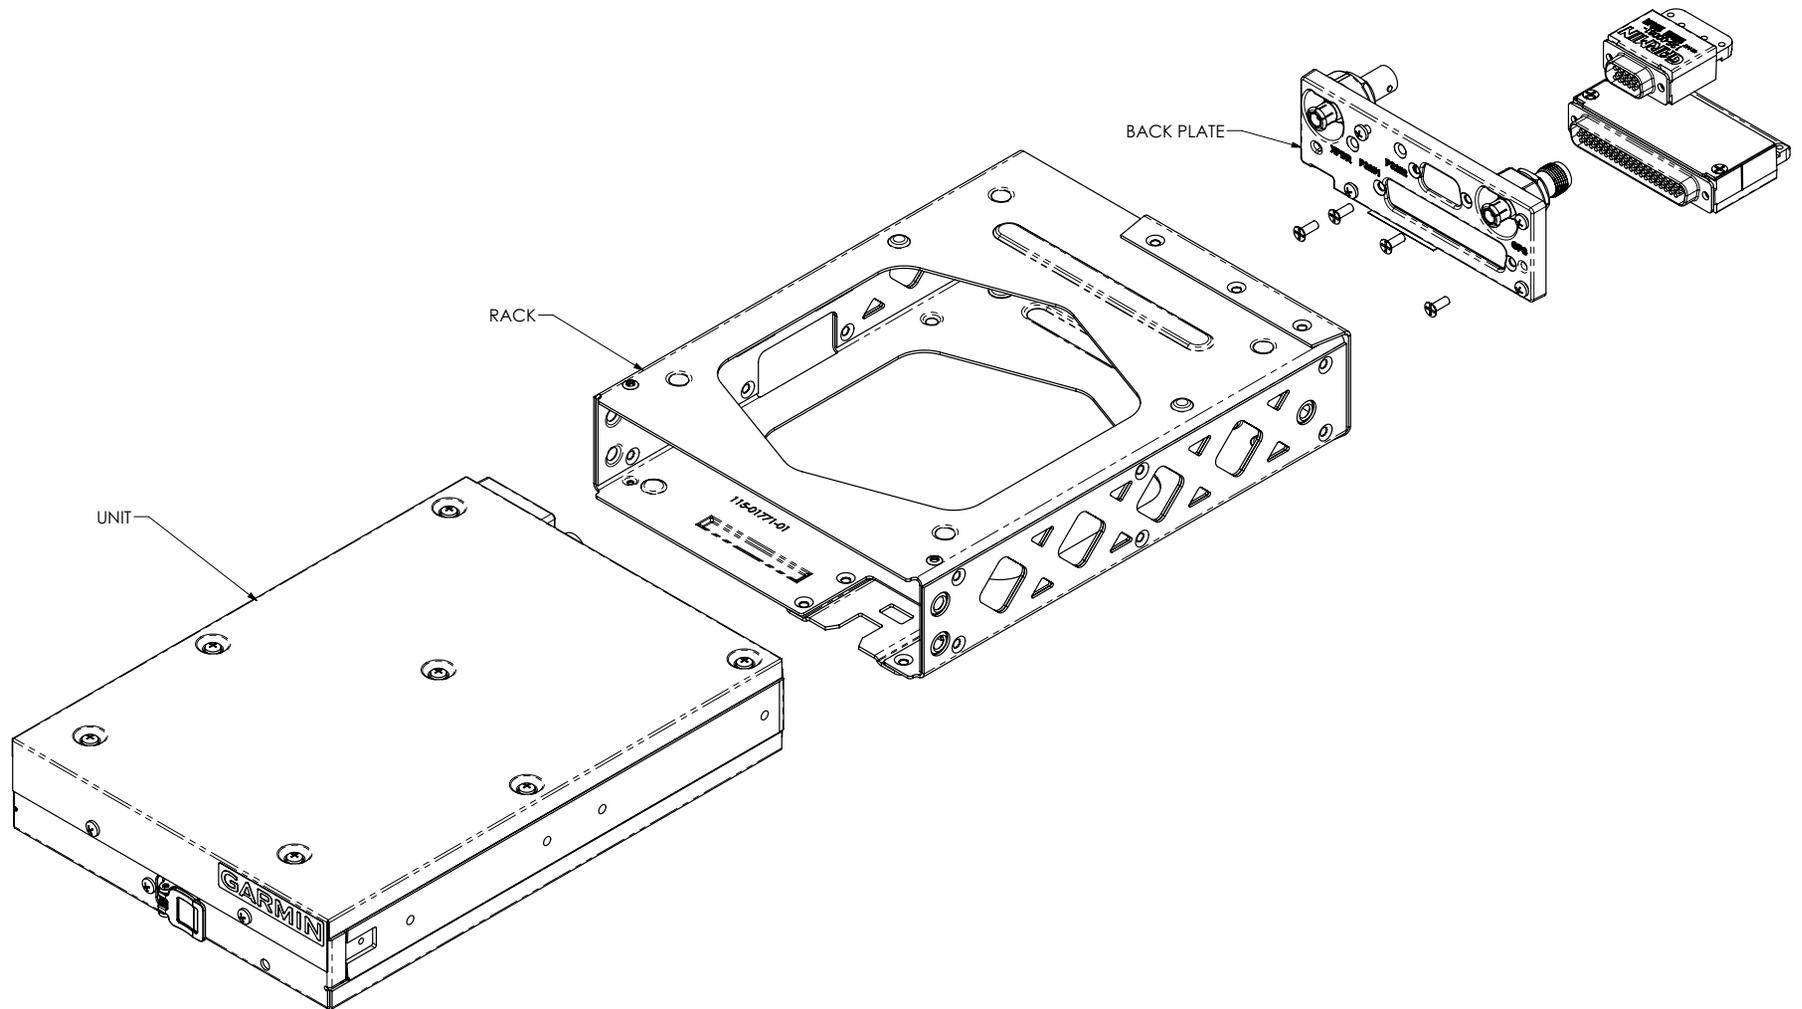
GTX 3X5 Horizontal Remote Mount Rack Assembly
